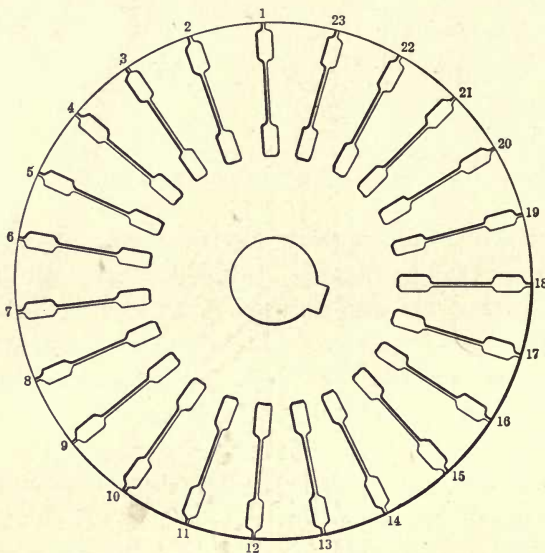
ROTOR LAMINATIONS OF A BOUCHEROT MOTOR.
